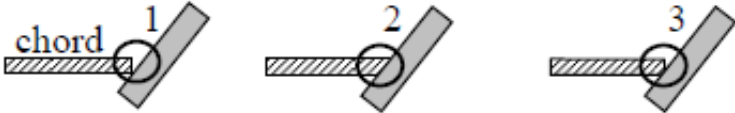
Types of laser cuts. 1) perpendicular to its axis; 2) parallel to the diagonal; 3) a combination of both.
